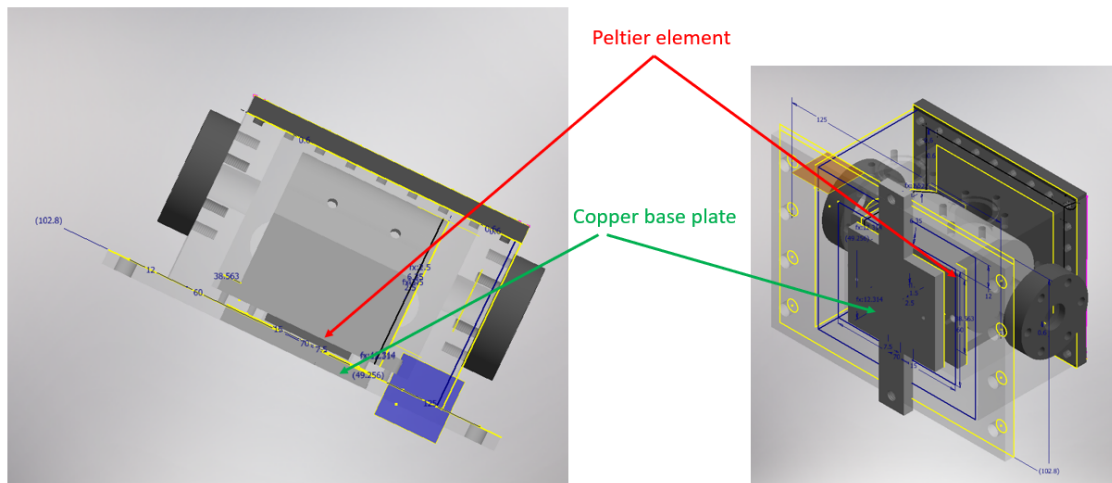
Titanium chamber hollowed out to show how the cavity housing, peltier element and copper base plate are to be fitted.
